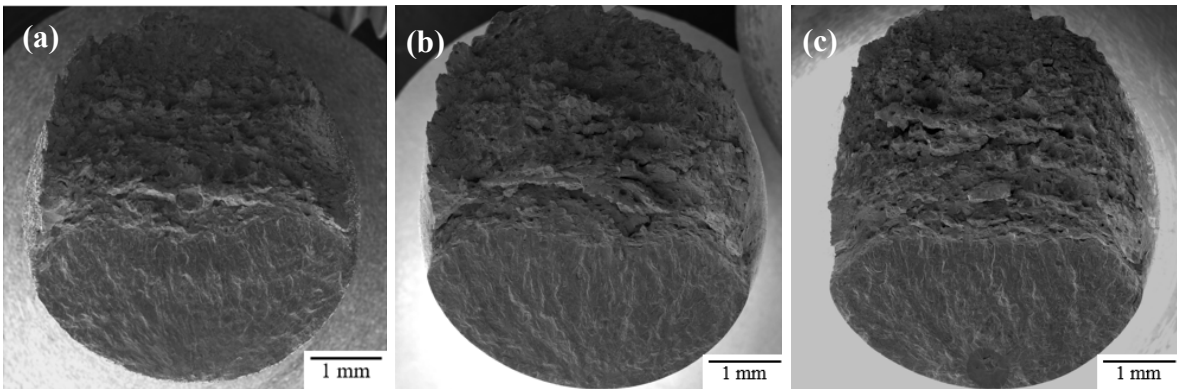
Representative ultrasonic fatigue fracture surface fractography for 5.0 mm CL M2 samples (a) as-built, (b) surface removal, and (c) contour removal samples.
